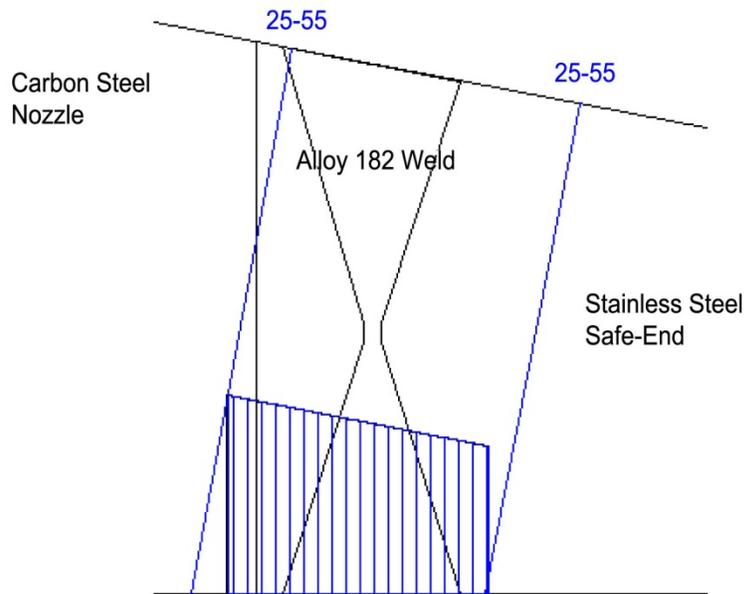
Steam Generator Hot Leg Nozzle Weld Circumferential Scan CRV Coverage Assessment
